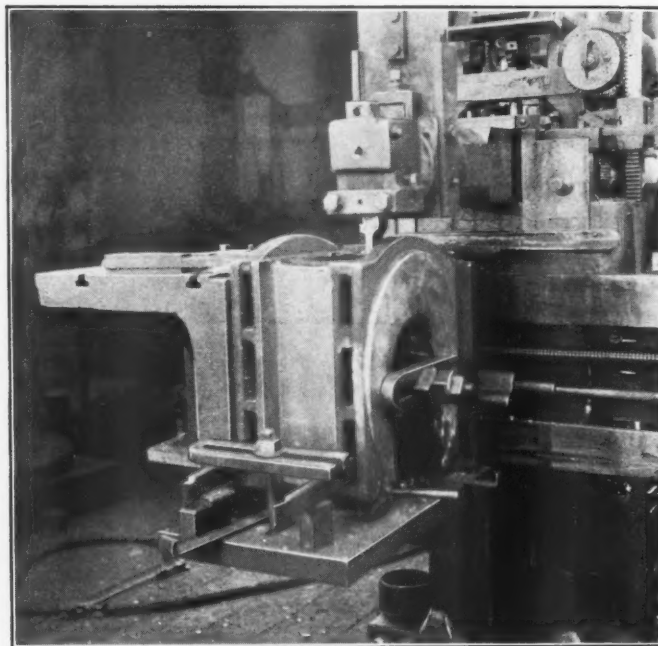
Planing End of Boxes in Draw Cut Shaper
